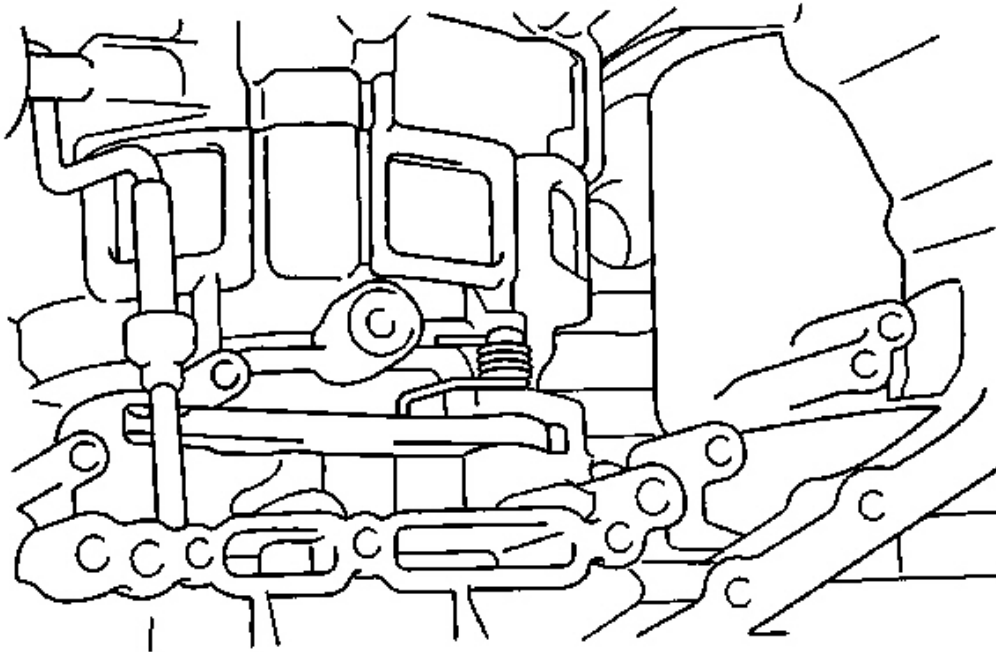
Parking Lock Pawl, Shaft & Torsion Spring
